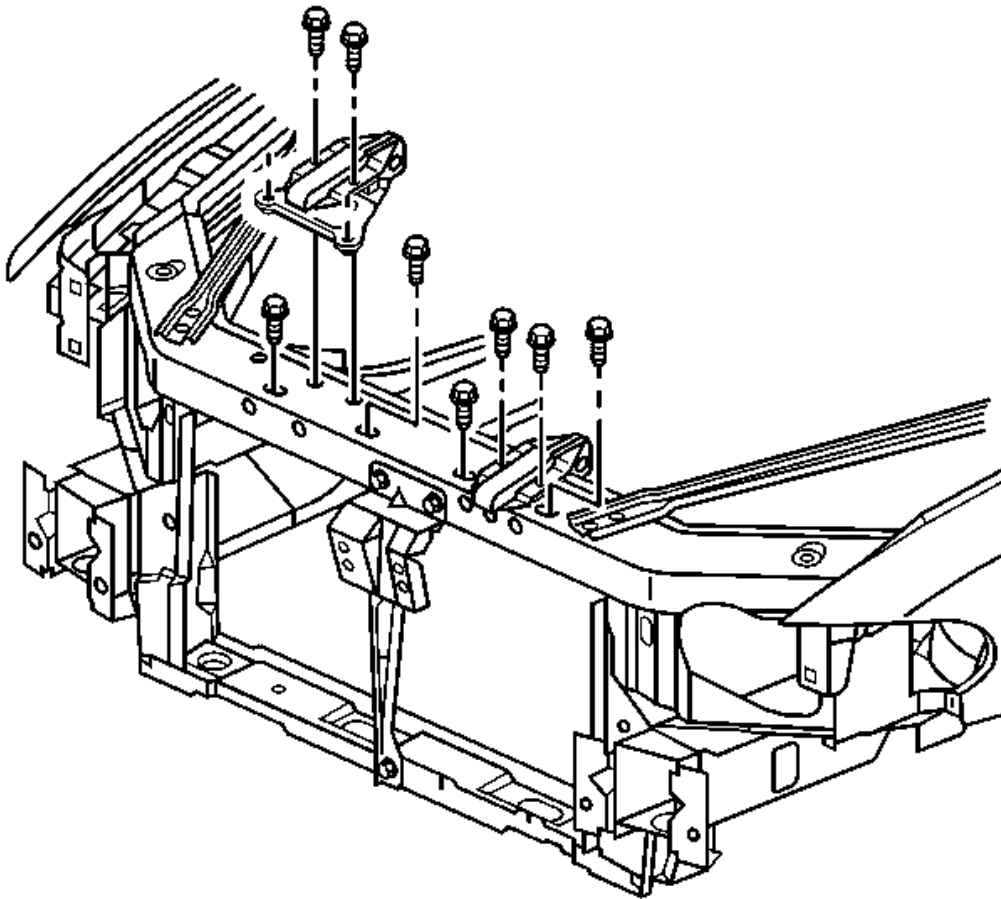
Installing Engine Mount Strut Bracket - Upper Radiator Support
